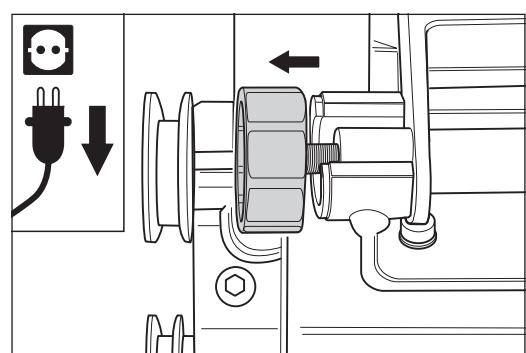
until the two nuts used to fit into the motor bearing bracket are exposed.
